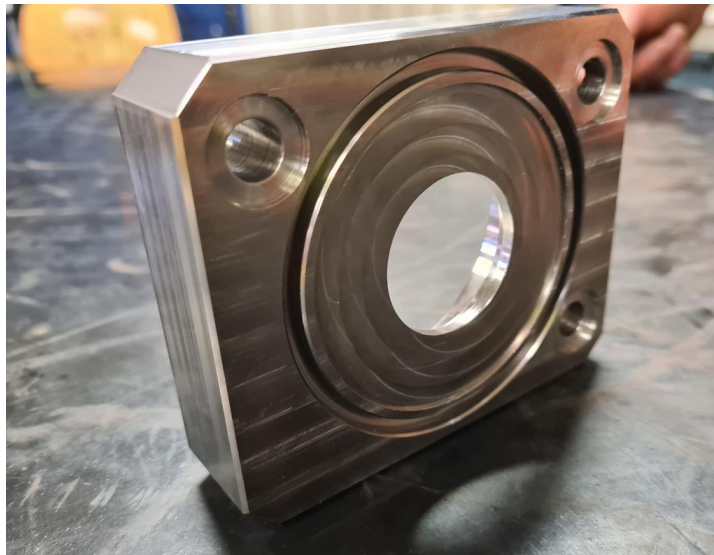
Component manufactured in stainless steel to reduce corrosion.
